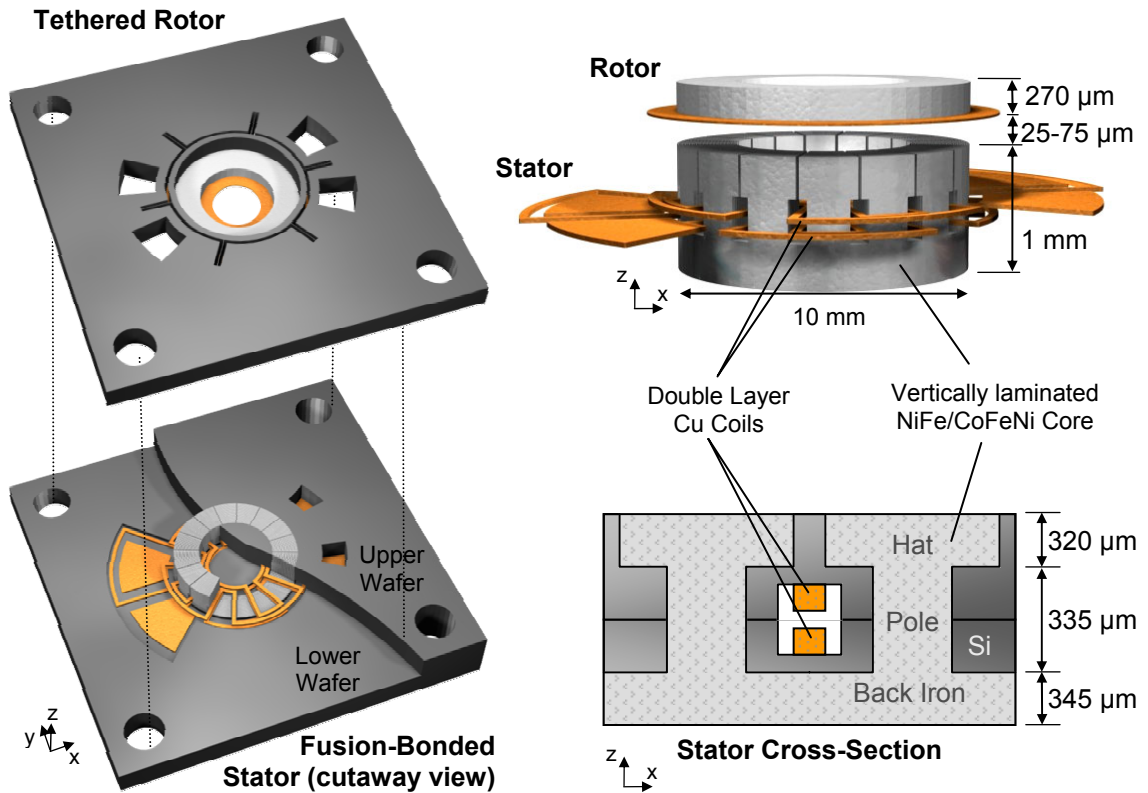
Renderings of the magnetic induction machine (z-axis expanded by 4x and air gap exaggerated). The cutaway view of the stator shows the machine components embedded within the bonded silicon.
